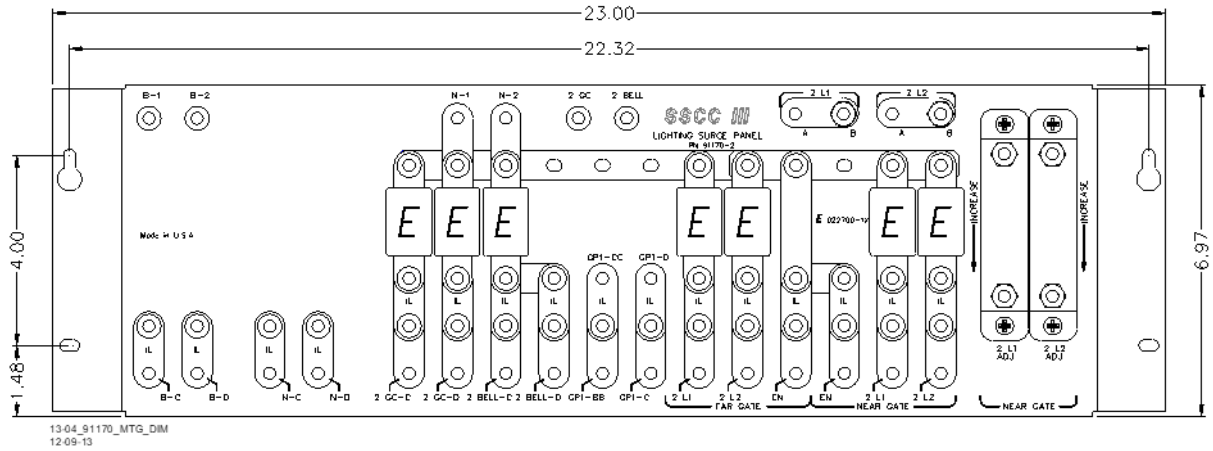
SSCC III Lighting Surge Panel Mounting Dimensions
